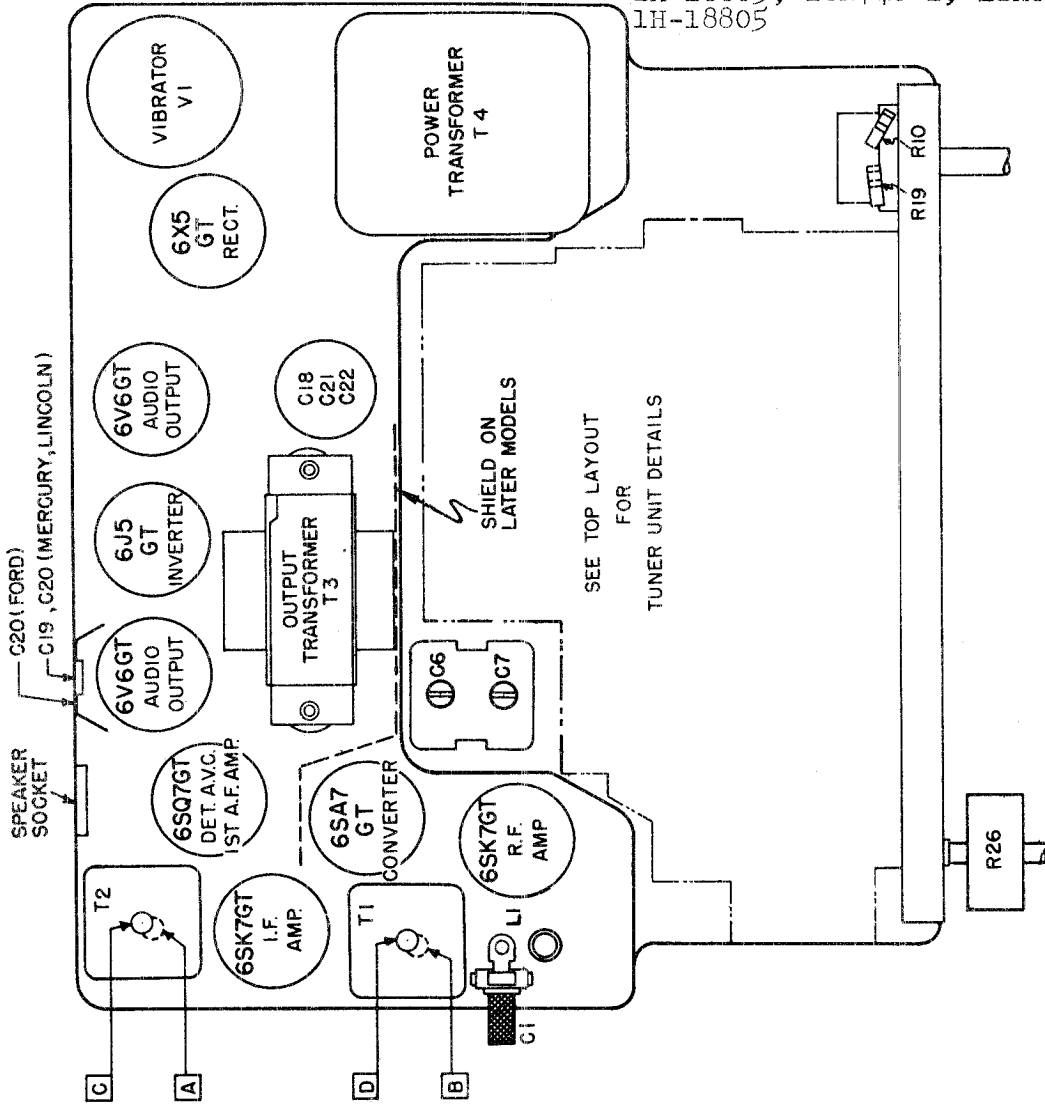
PARTS LAYOUT - BOTTOM OF CHASSIS
